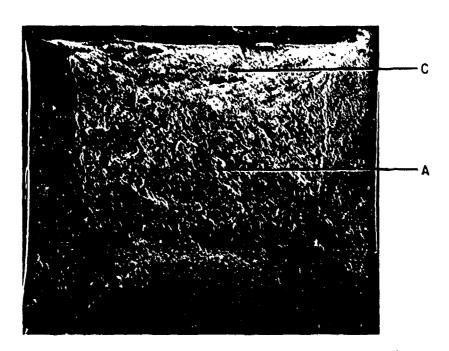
Fracture surface of an HY-130 Charpy specimen tested at -83°C, 10x.
